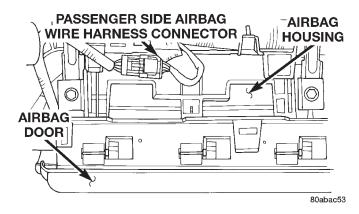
Passenger Side Airbag Connector Remove/ Install
